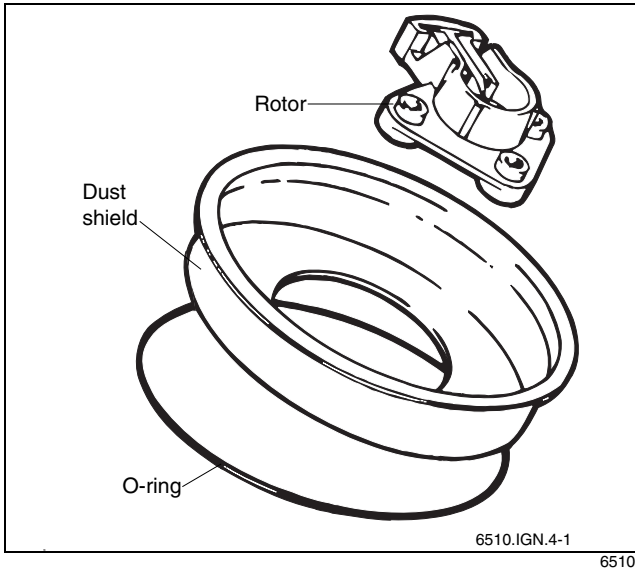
Ignition rotor, distributor cap dust shield and O-ring on M20 engine.
